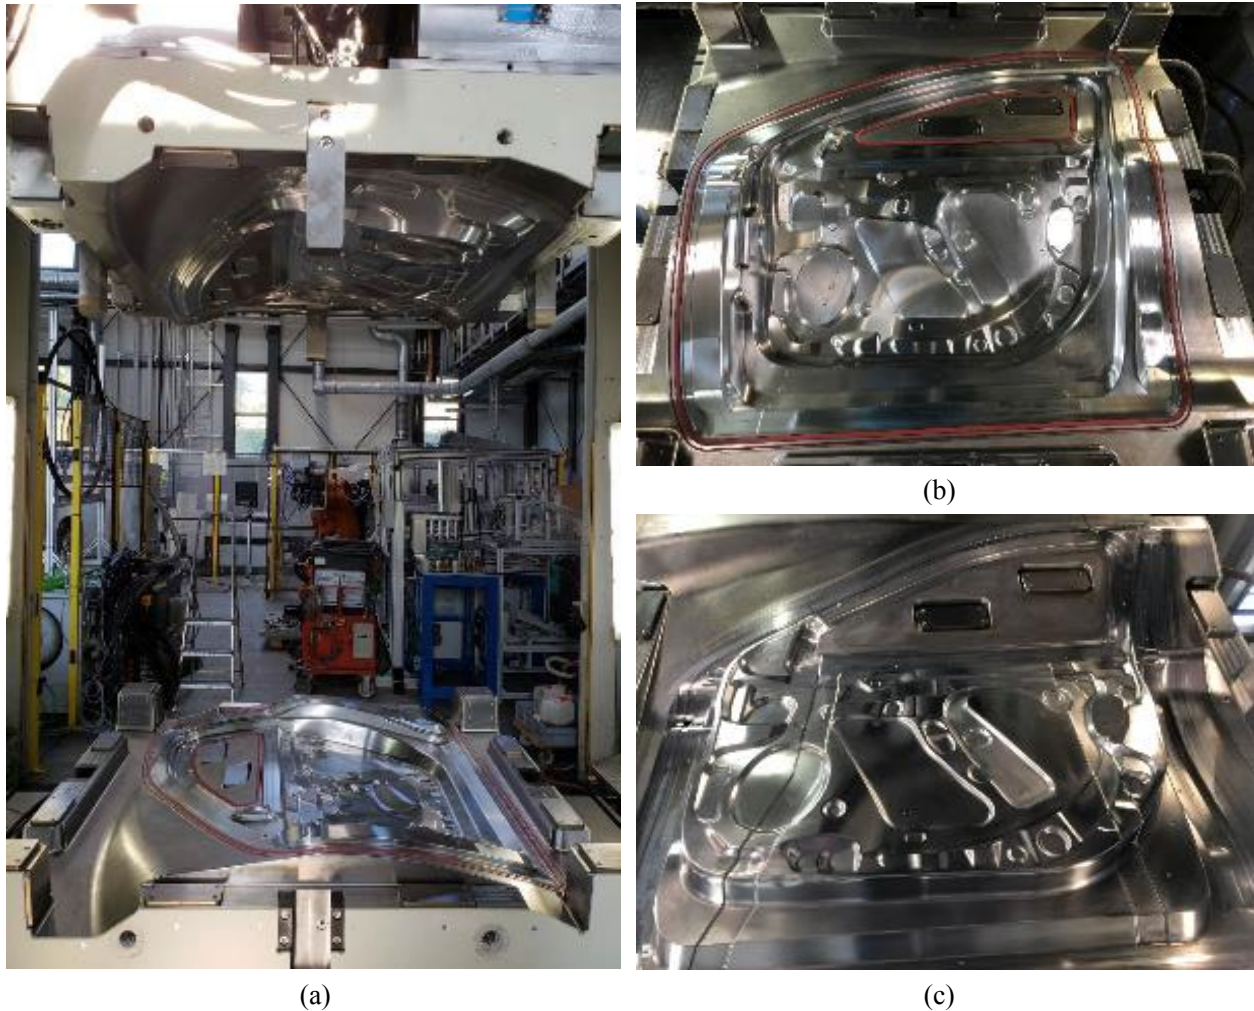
C.17. Completed inner door tool (a) mounted in the press with (b) lower surface and (c) upper surface.
